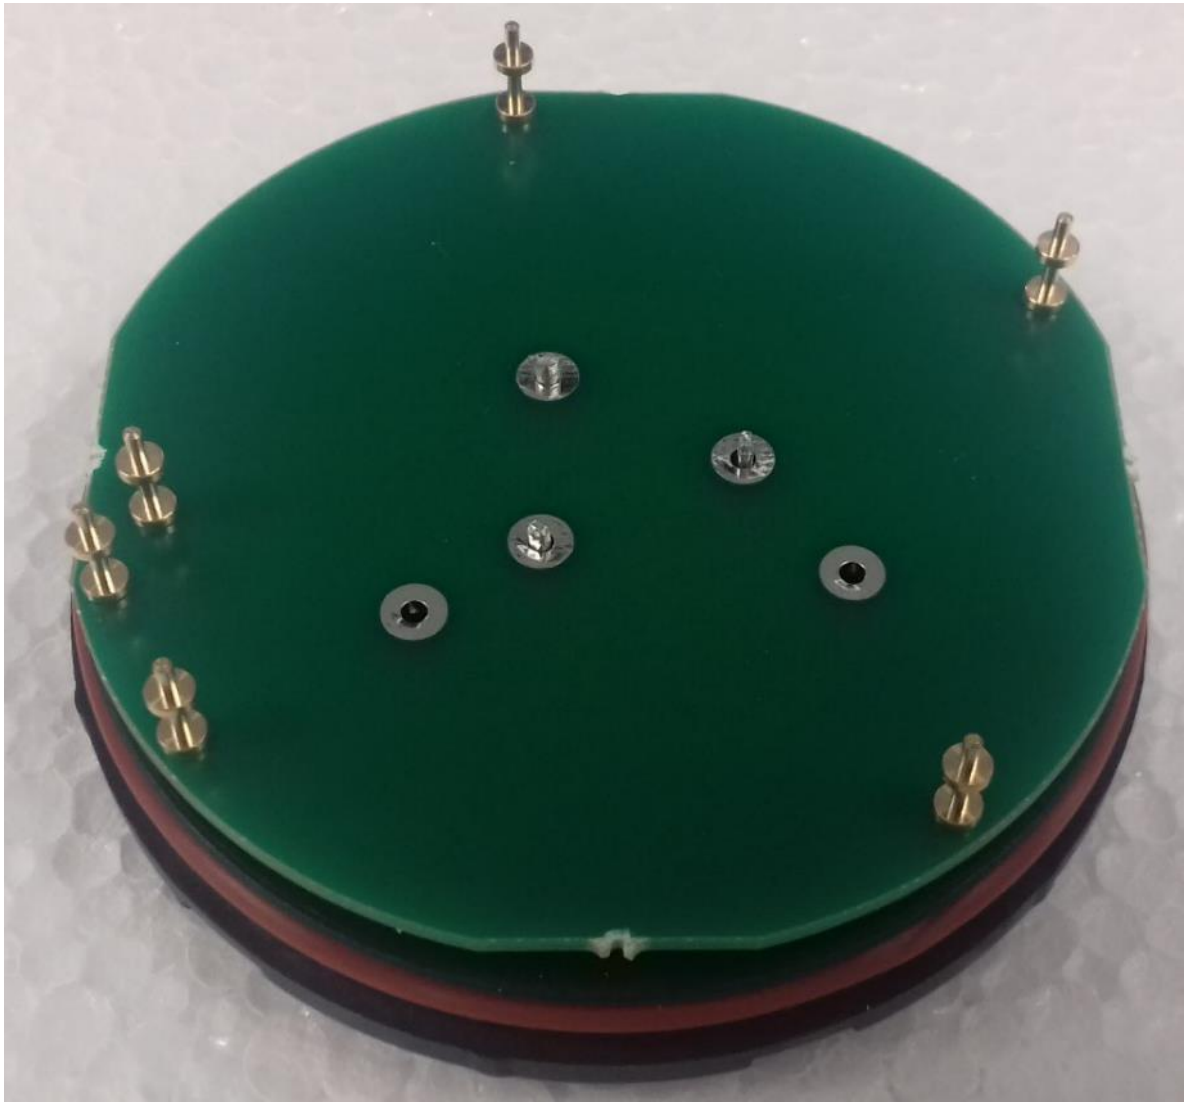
Telecell base with 6LPCCD and 6 mm PCB spacers
